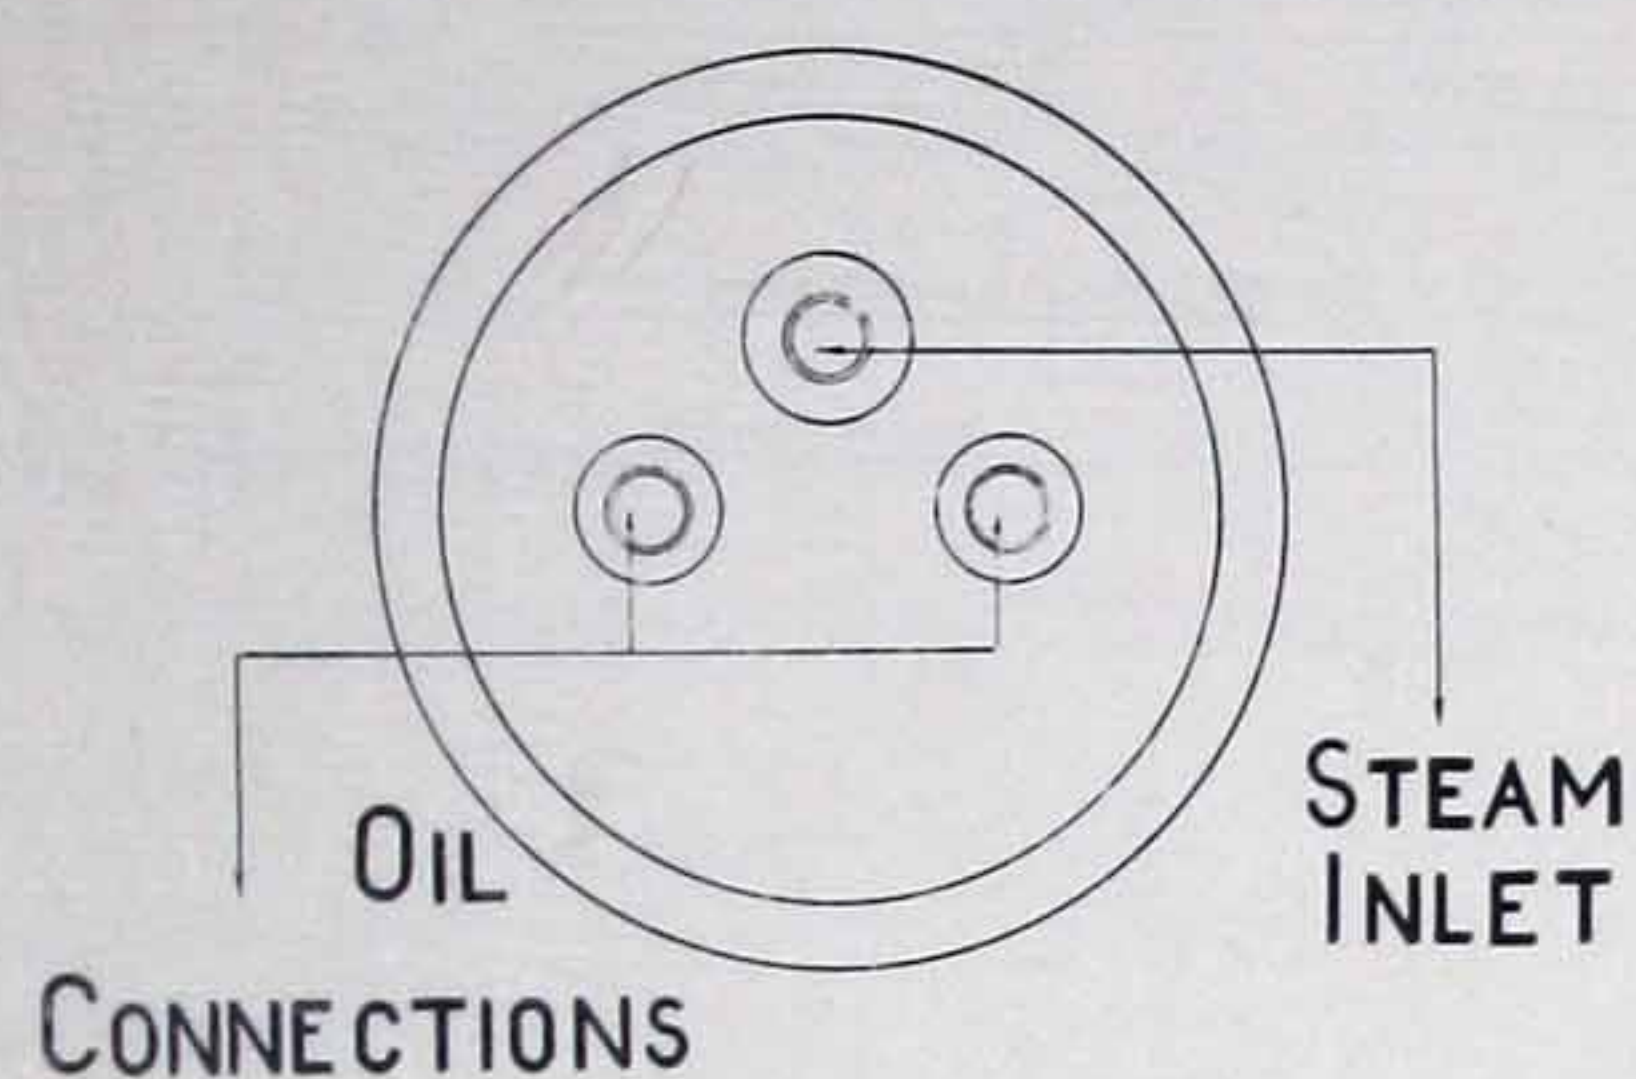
D. FUEL OIL HEATER WITH DOUBLE TUBE SHEETS
